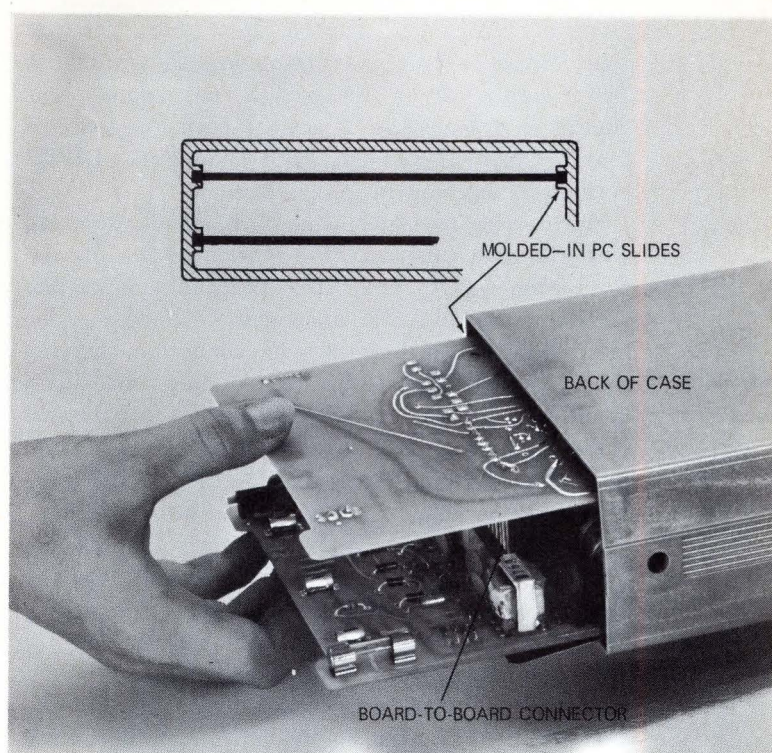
From 2-D to 3-D is accomplished with just one multi-purpose injection-molded plastic case. Molded-in PC slides accurately position the two boards. Similarly, molded-in openings in the front of the case allow controls and read-outs on the boards to project to the outside world.
